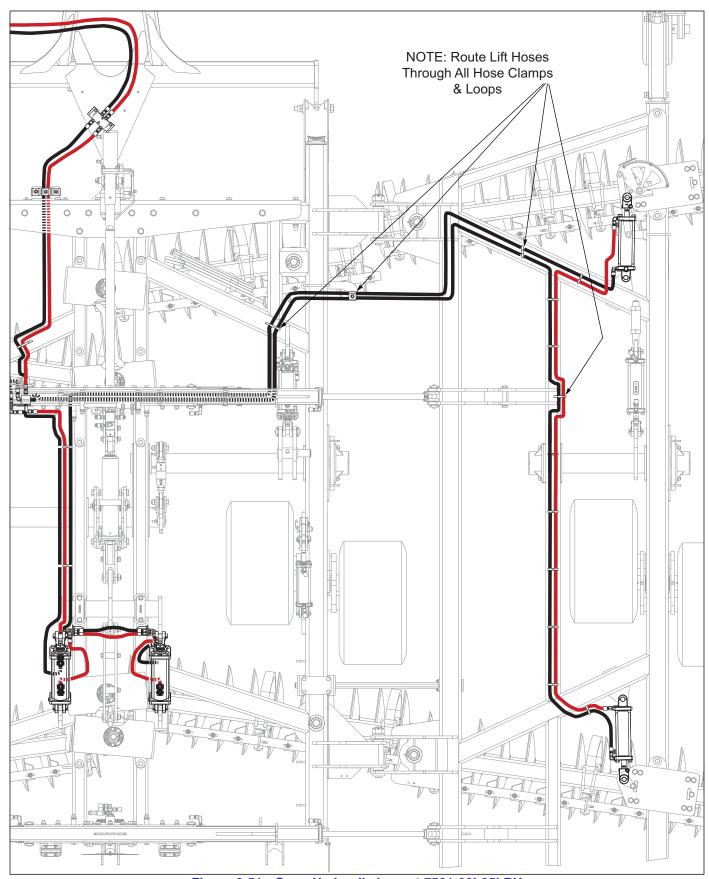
Gang Hydraulic Layout 7531-32'-35' RH
